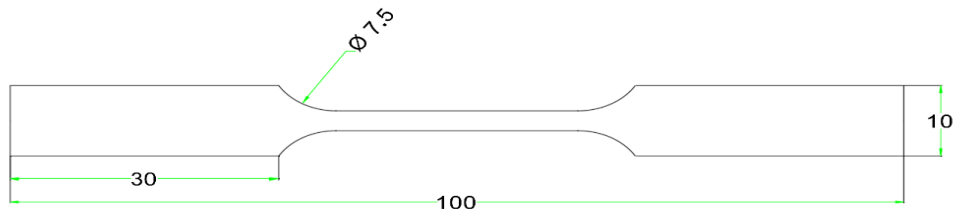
Dimension of a tensile welded specimen prepared by WEDM
